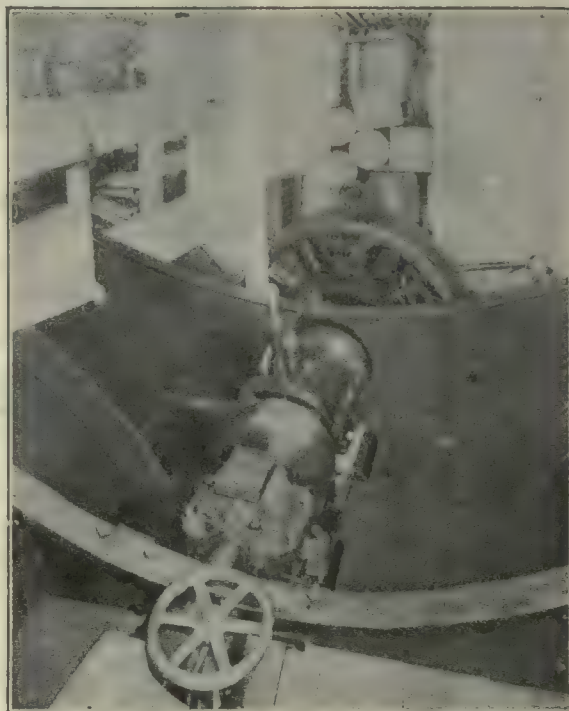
CLUTCH CONNECTING MOTOR AND PROPELLER SHAFT
